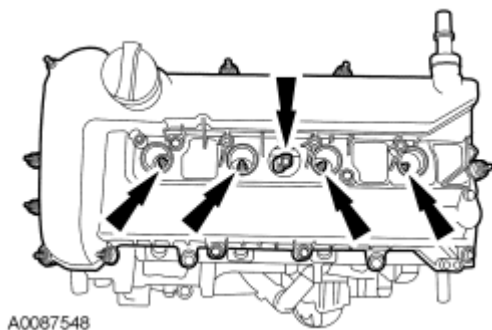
Locating Cylinder Head Temperature Sensor And Spark Plugs
